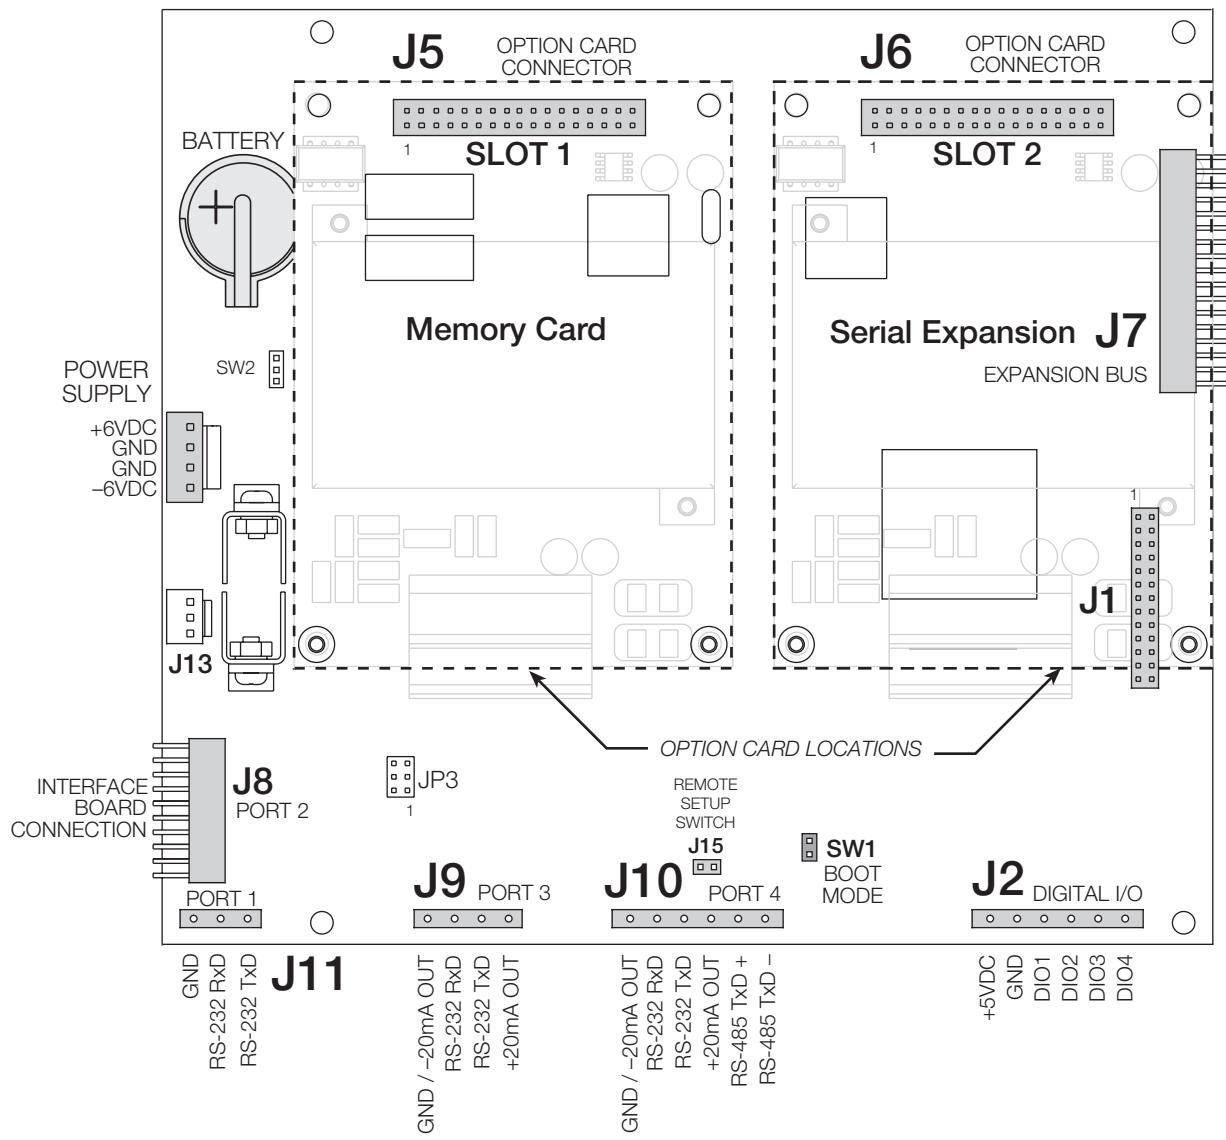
920i CPU Board, Showing Option Card Locations
